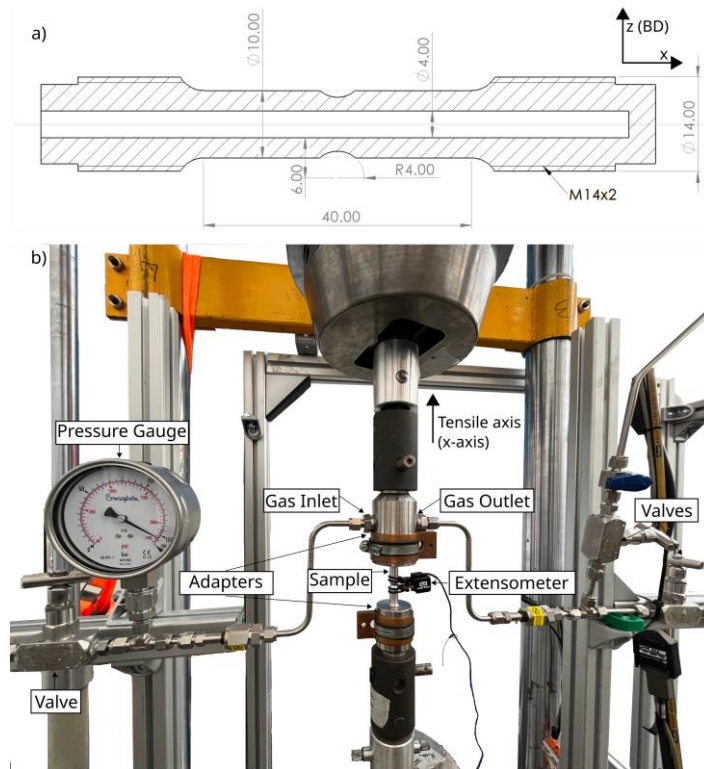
(a) Sample dimensions. (b) Test setup for SSRT. The tensile loading direction is the x-axis.
